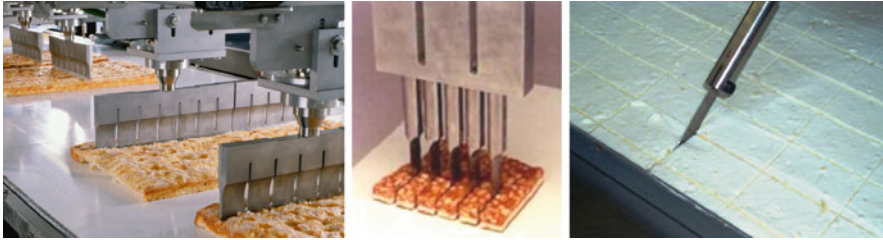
Application of ultrasonic cutting tools: An assembly of cutting sonotrodes excited perpendicular to the cutting edge (*left*; courtesy of Döinghaus GmbH, Delbrück-Hagen, Germany); A sonotrode with slitter elements (*middle*; <http://www.dukcorp.com/us/products/food/food.htm>, accessed: 08/08/2007) and an ultrasonic assembly with an independent blade excitation is parallel to the cutting edge (*right*; courtesy of Dr. Wolf and Partner, Halle/Saale, Germany)
